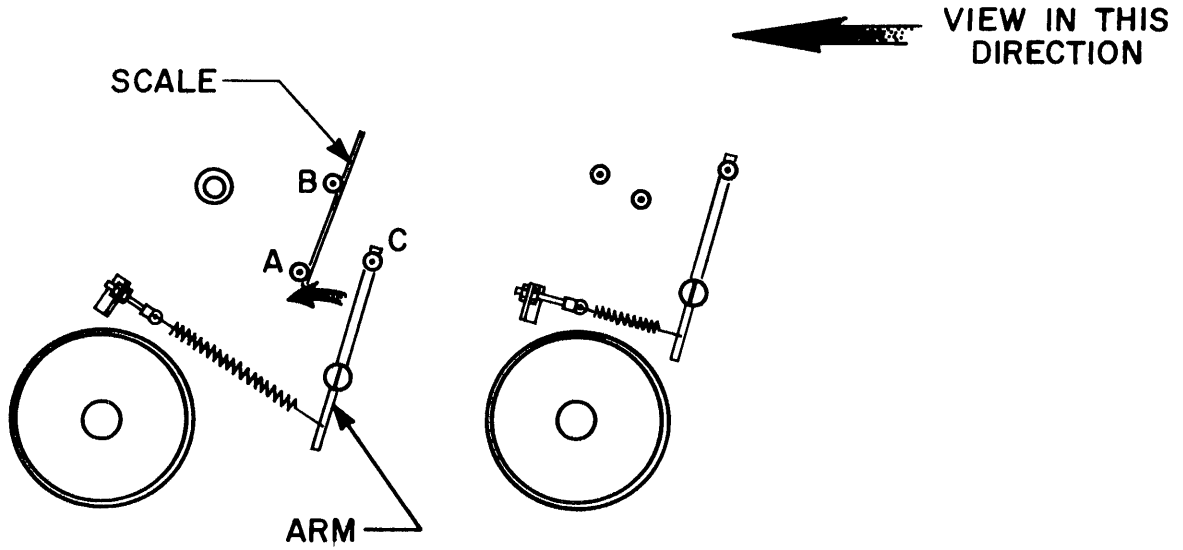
TAKE-UP TENSION SPRING MEASUREMENT
